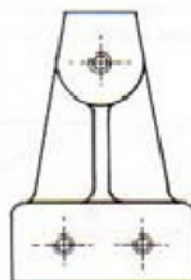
Machine the base to clean up and mark out the positions of the three hole centres. Drill and tap to holding down bolt size.
